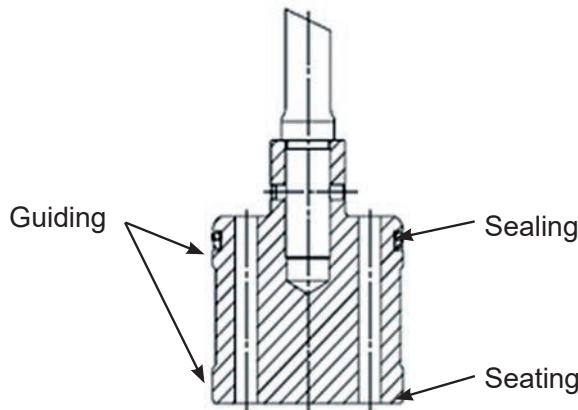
Plug Guiding, Sealing & Seating Surfaces
